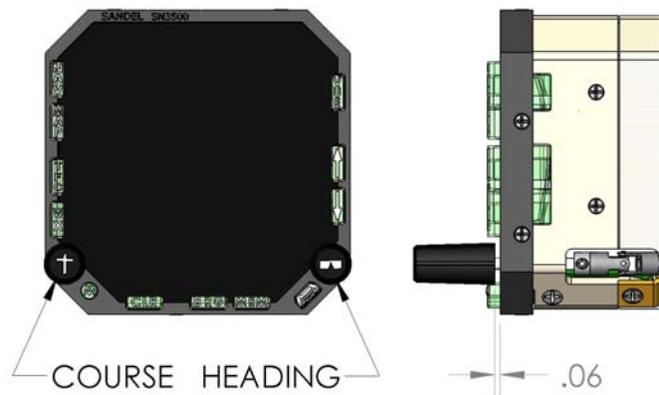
Place encoder knobs over encoder shafts. Leave approximately 0.06” (1.5mm) gap between back of encoder knob and face of bezel. Tighten encoder knob collets using flat blade screw driver.
